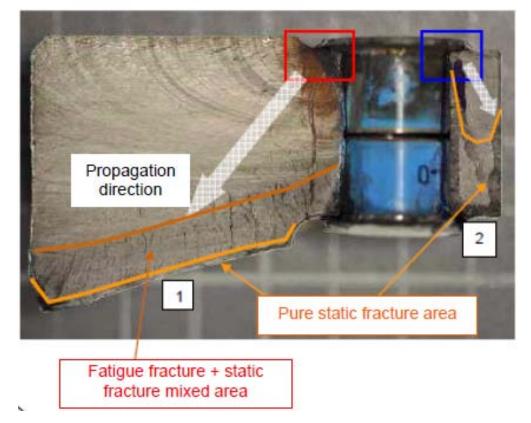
A cross-section through the main rotor hub ear (yoke) number 5 with marked fatigue zone, mixed zone and the zone final fracture (static fracture zone).
